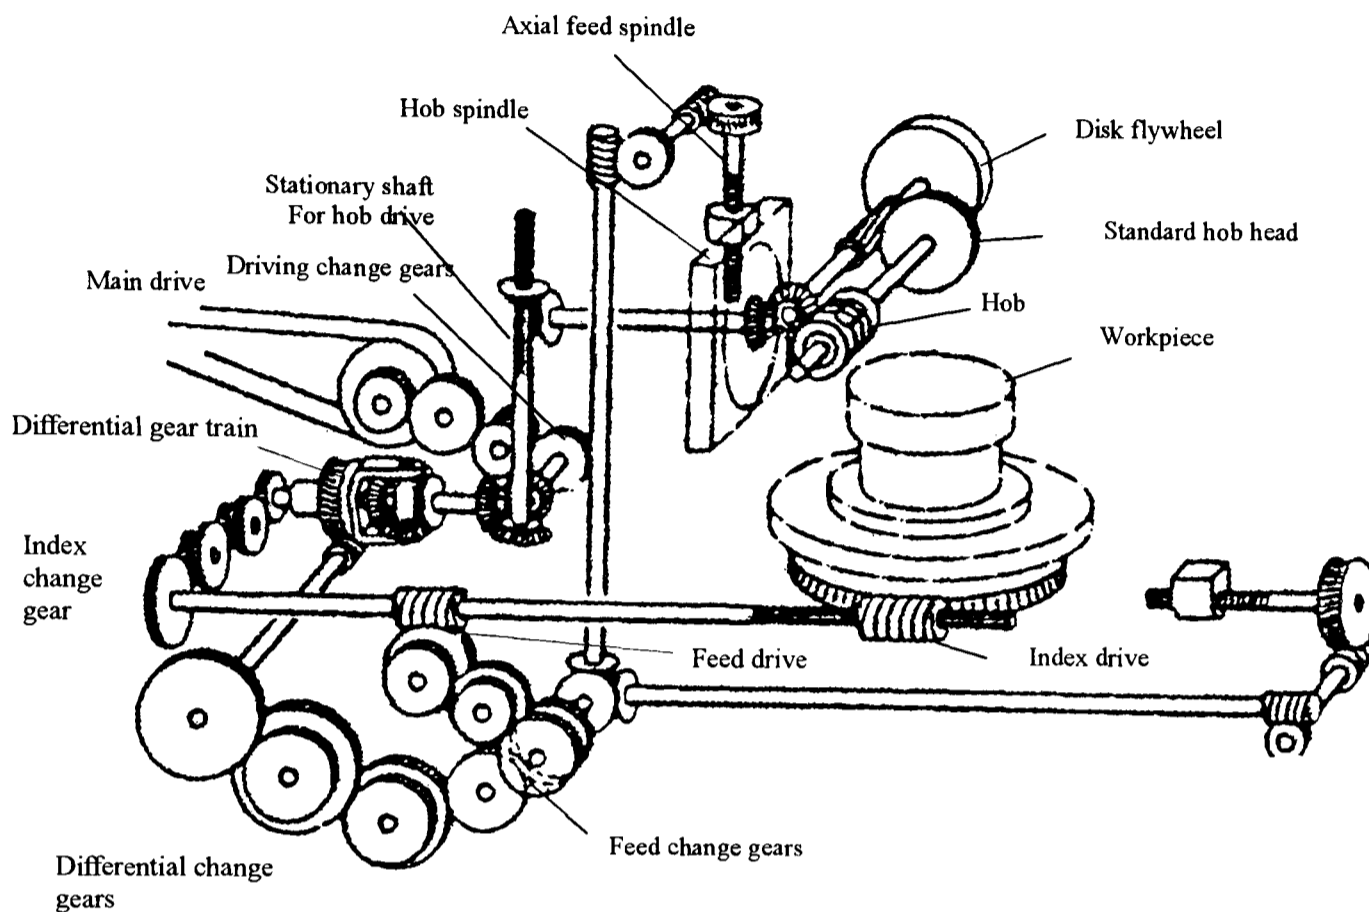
Mechanical arrangement of a conventional vertical hobbing machine. [Cluff]
